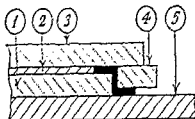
Cross section of a typical stretch-form die for a Z-shaped section.
